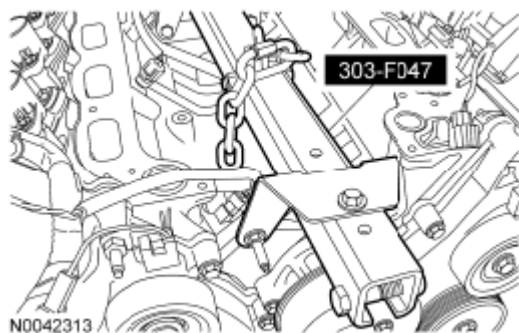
Identifying Engine Lift Bracket (303-F047)
